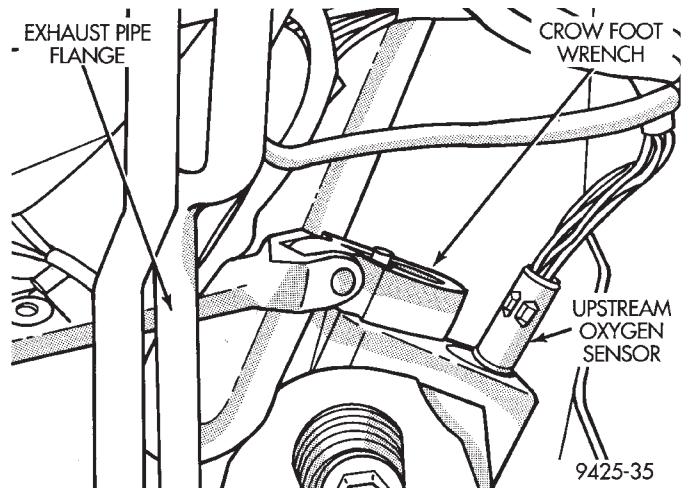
Upstream Heated Oxygen Sensor Removal/Installation
